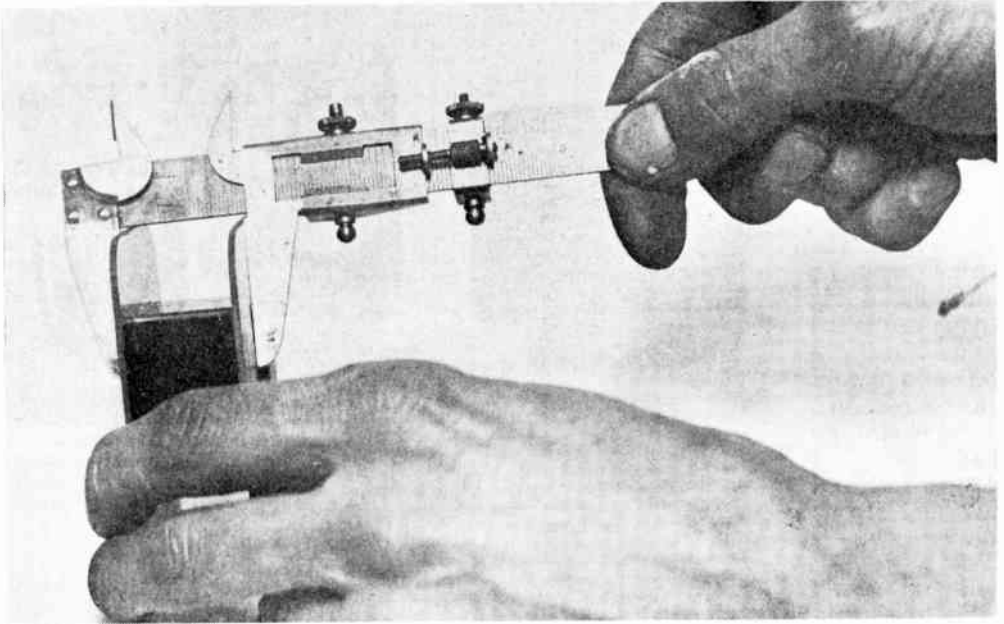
TESTING THE BOBBINS FOR SIZE.
